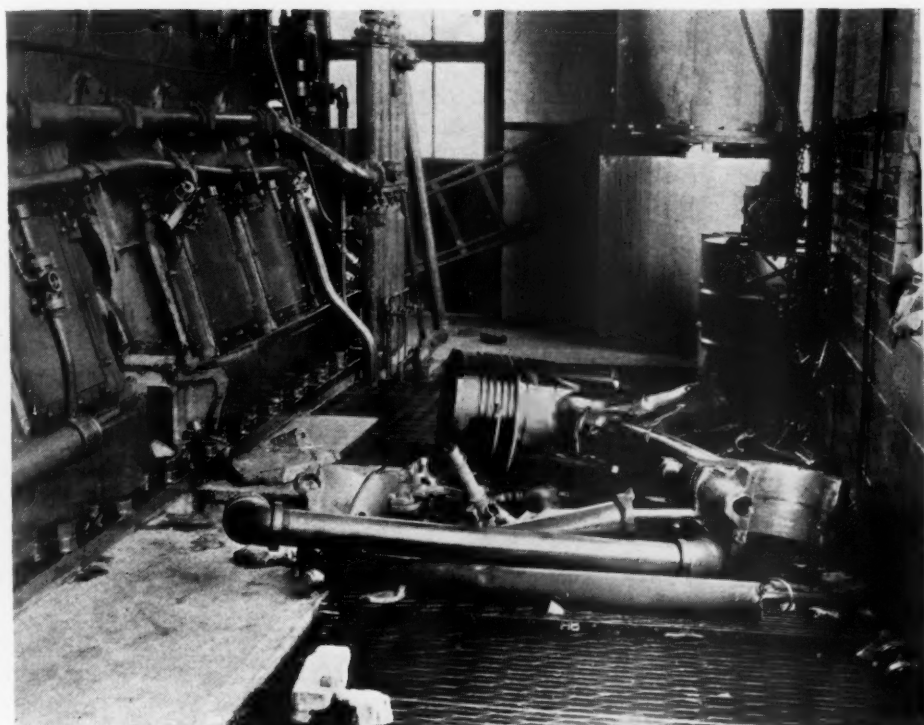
A piston thrown through the side of this 1200-hp. engine. Serious damage to the framework was repaired by welding without dismantling the engine. See also Figs. 8, 9 and 10
